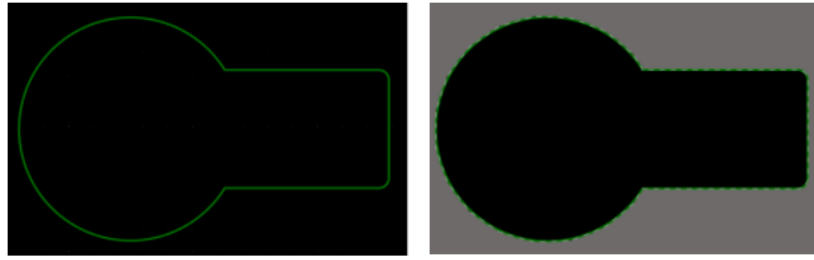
Left : Board shape of the PCB obtained from the DXF file. Right : Final shape of the PCB
